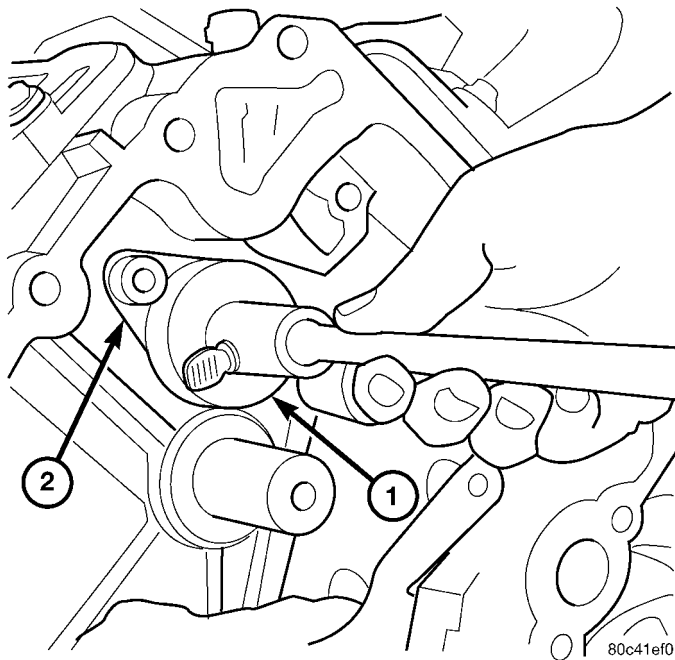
Counterbalance Shaft Removal/Installation Tool
